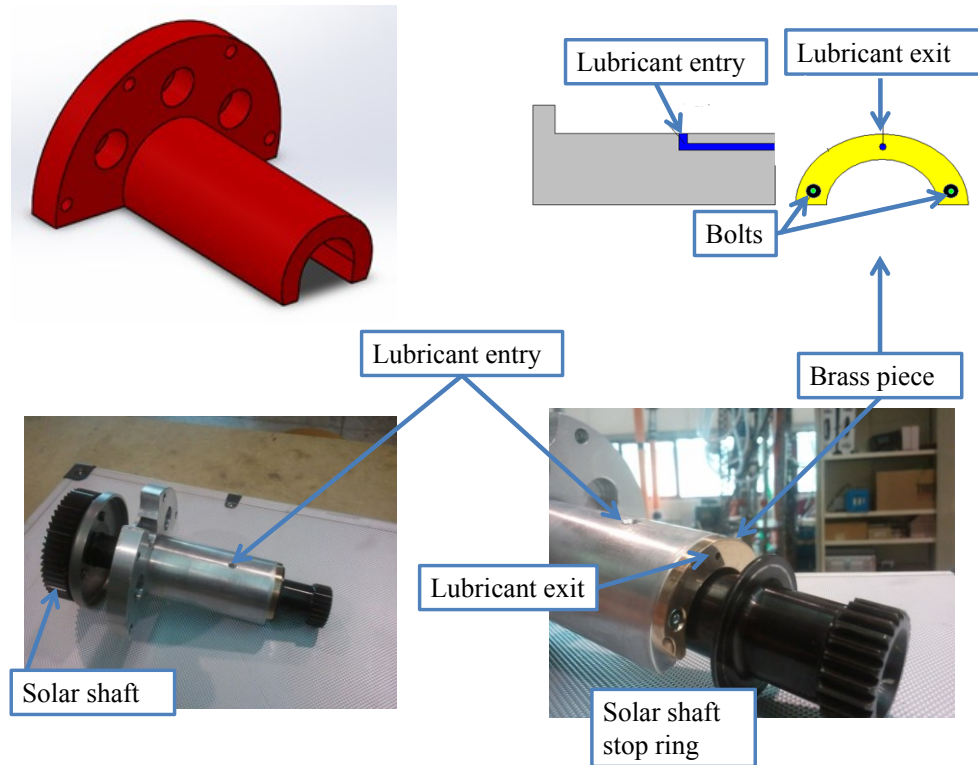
Solar shaft axial blocker: 3D and 2D lateral view draws of the component (on the top); the realized component (on the bottom)
